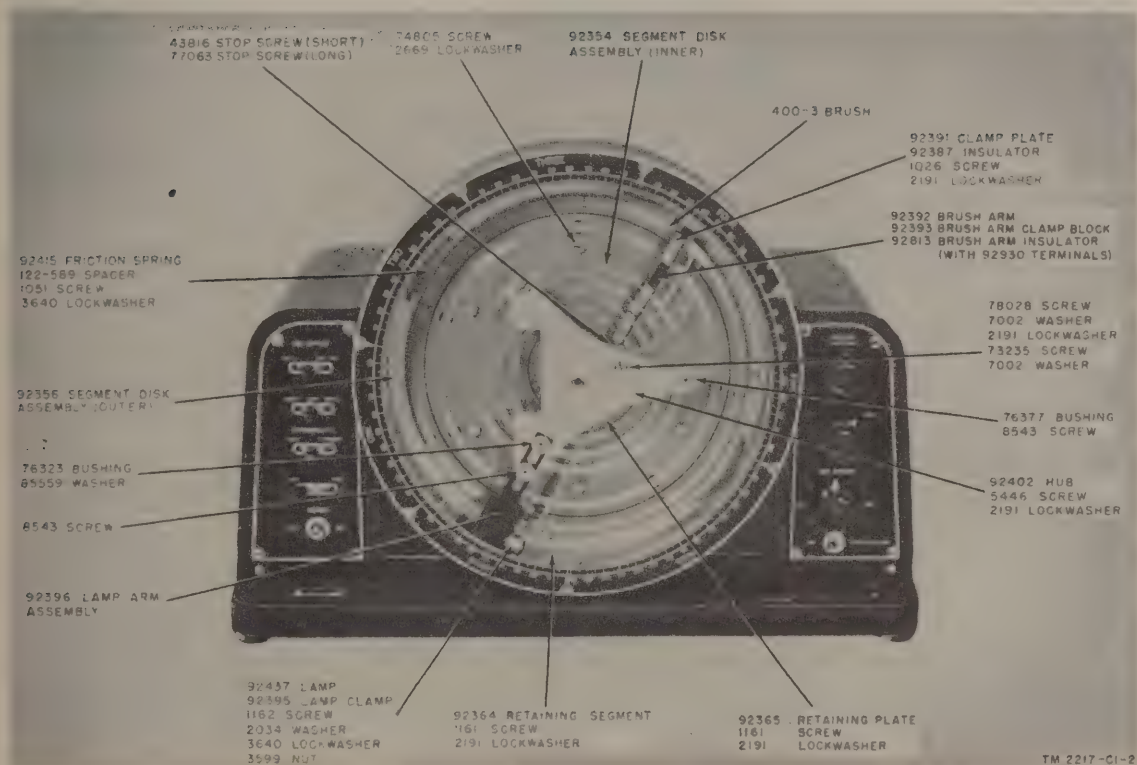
(Superseded.) Distortion Test Set TS-383(*)/QG, front view, face plate removed, location of parts for DXD1, DXD4, and DXD5.
